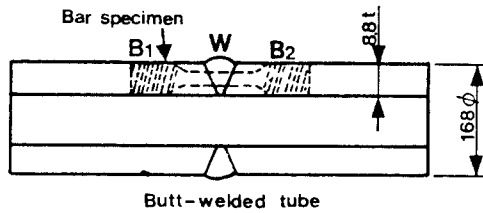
Schematic of welded tube showing the location of the creep-rupture and tensile specimens taken
